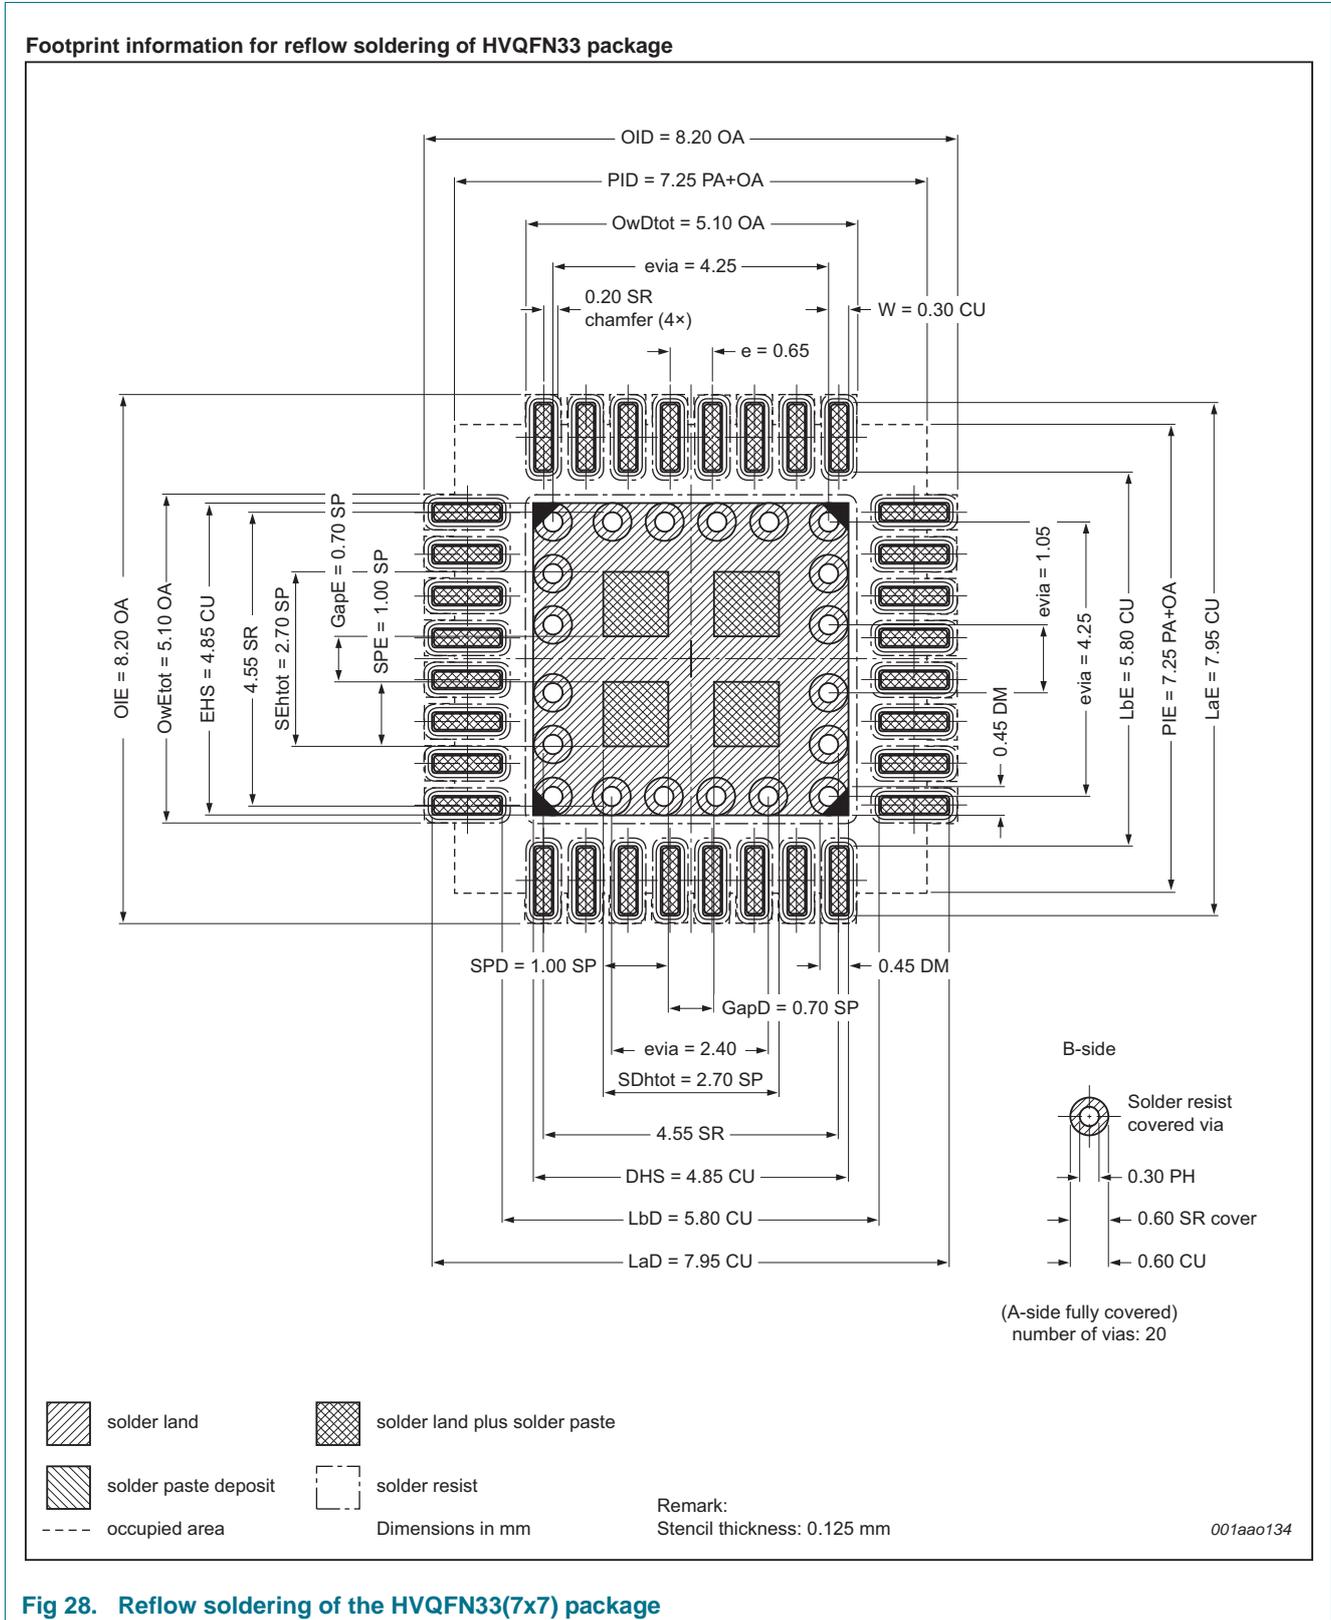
Reflow soldering of the HVQFN33(7x7) package
